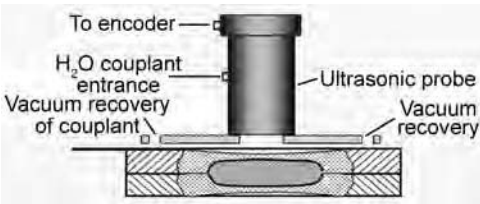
Inspection system for B-scan ultrasound of spot welds
